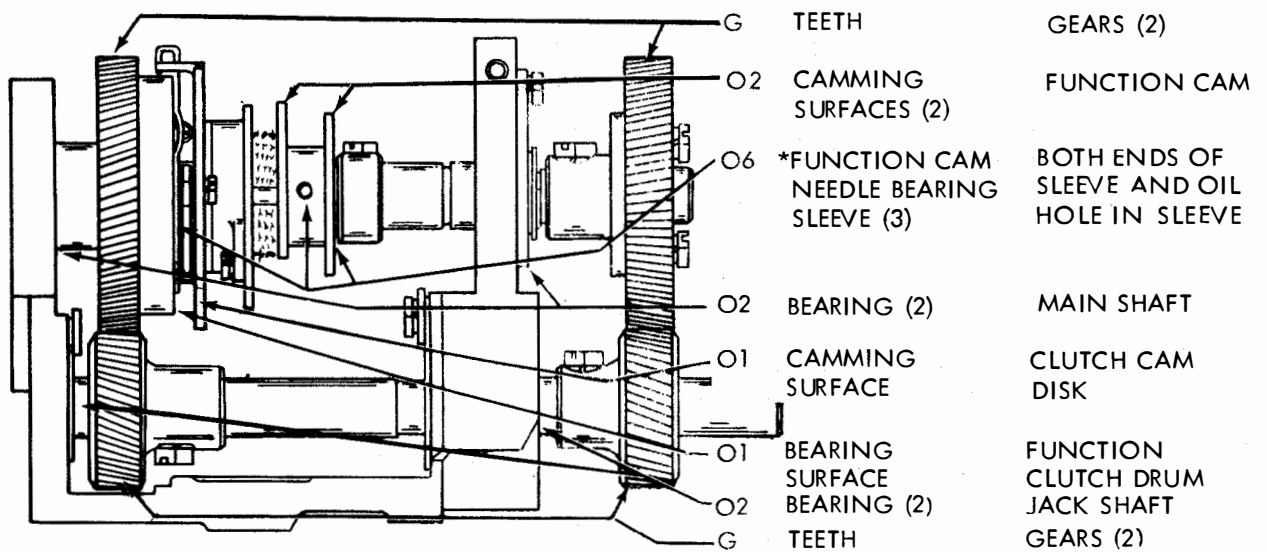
Main Shaft and Jack Shaft (Two-Shaft Unit)
